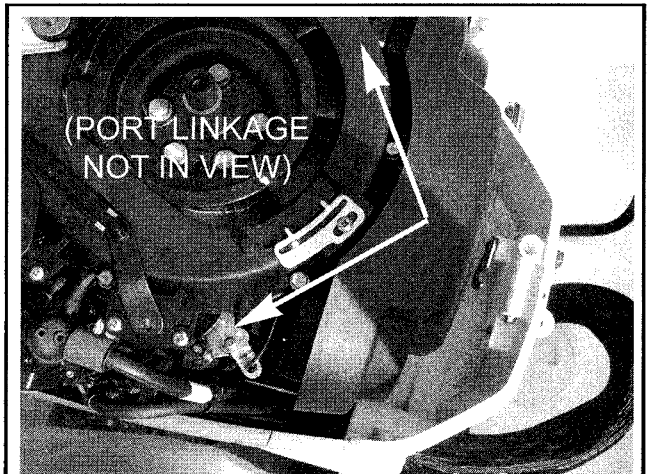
Throttle plate synchronization takes place at the linkage on top of the throttle bodies on either side of the front of the motor (right behind the air intake silencer)
